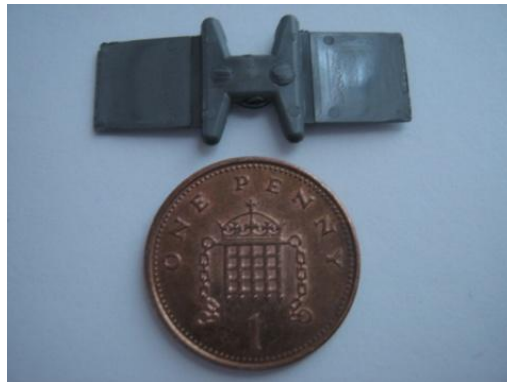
316L feedstock moulded specimen with blind holes in the runner.
